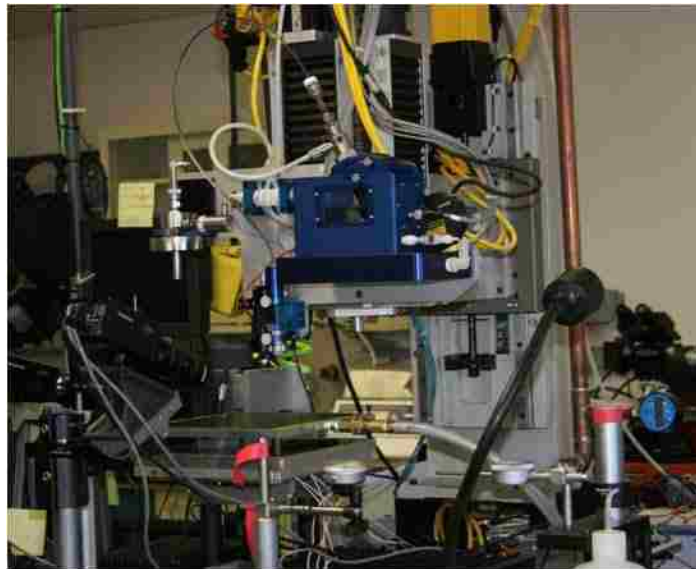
Optomec M3D system mounted onto a robocasting robot.
